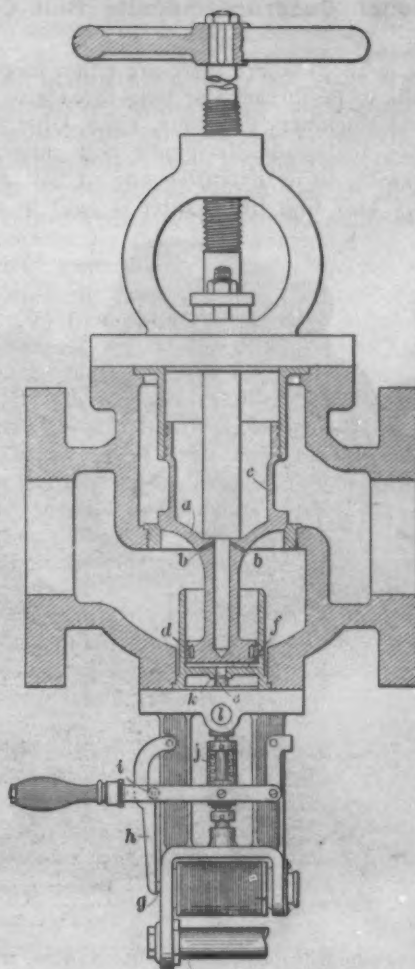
Sectional View Showing Details of Construction of the Locke Combination Throttle Valve and Automatic Engine Stop.
